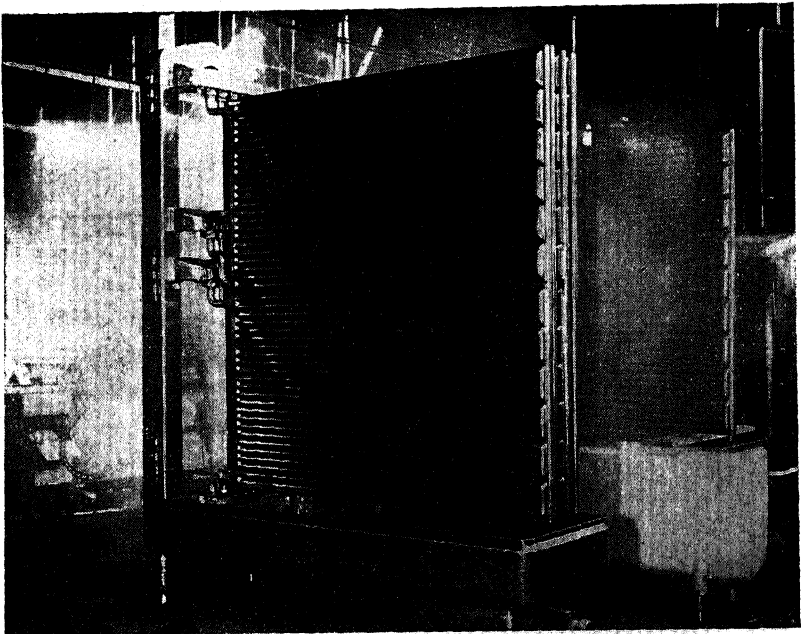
Partially completed milk cooler of all welded construction. Stainless steel throughout.
